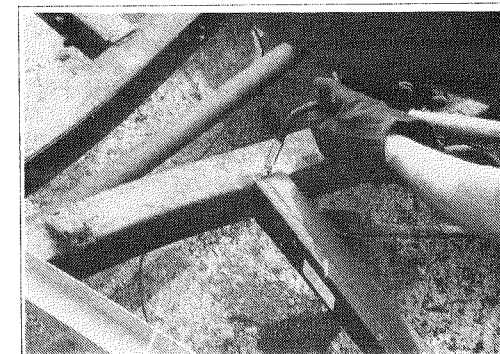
When all's well, weld up. Along the top and sides to begin with: the lower edge can be completed later.
